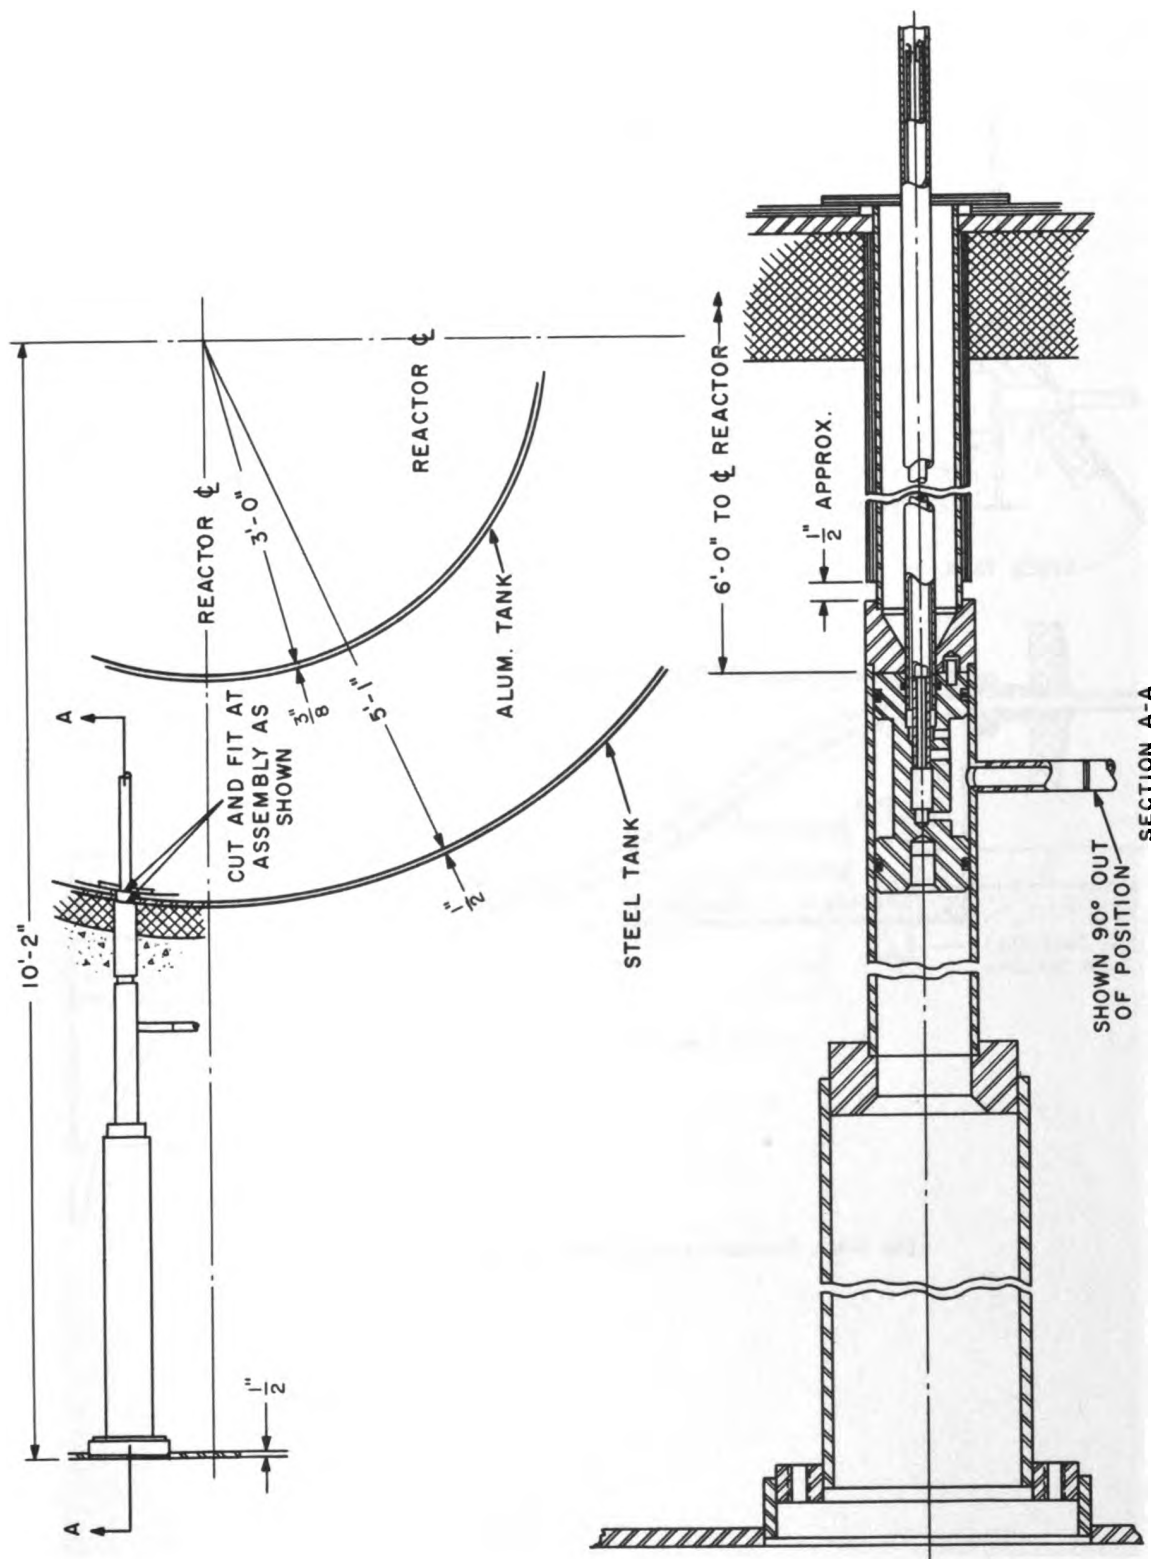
One-inch-pneumatic-tube arrangement, south face.
